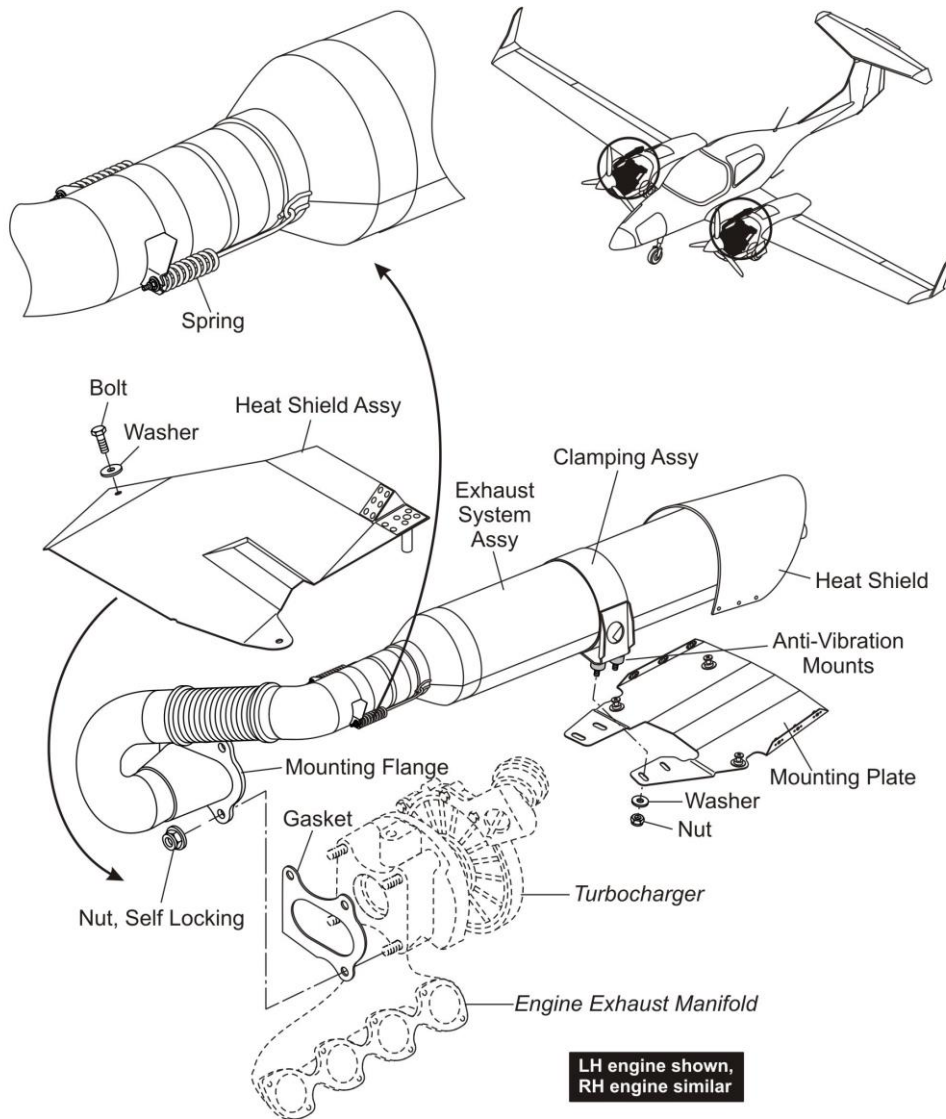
On Top Exhaust System Installation (OÄM 42-173/q through OÄM 42-173/u), Exhaust Tube Part Number: D65-7806-10-00\_05
